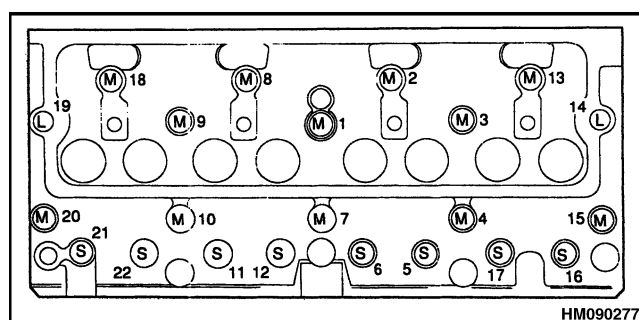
Cylinder Head Tightening Sequence, Four-Cylinder Engines
